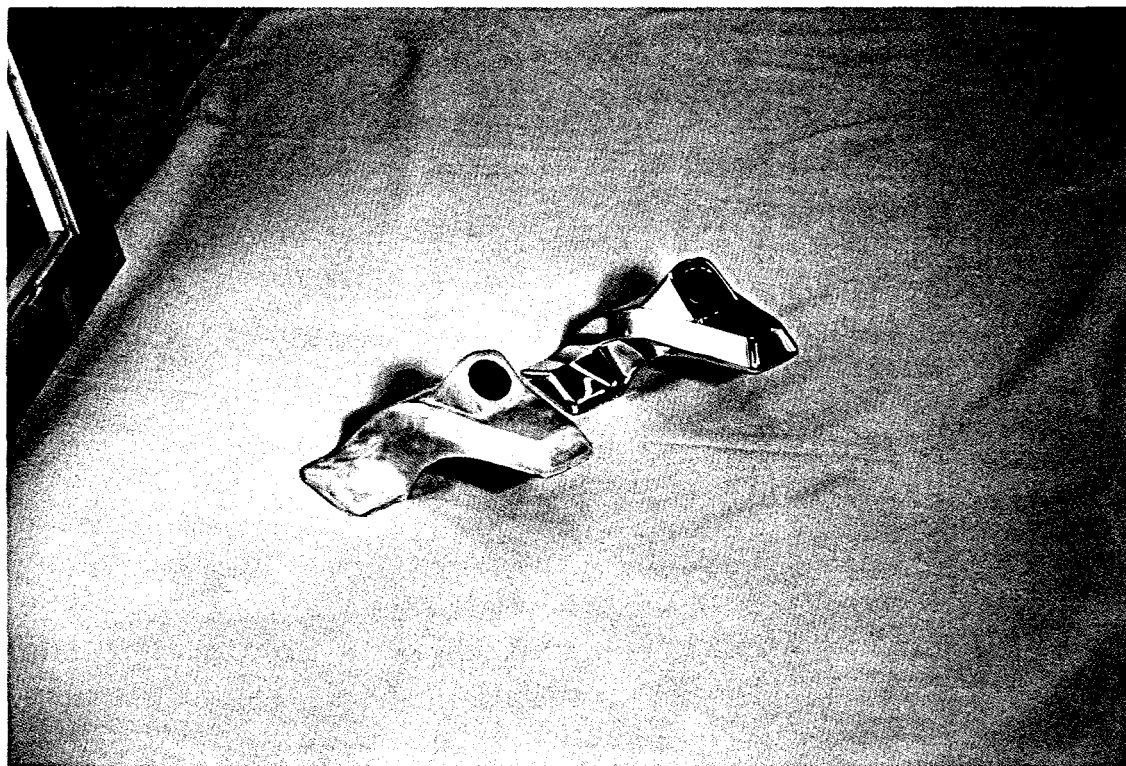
As-cast (left) and plated (right) faucet casting produced by Company A for die soldering confirmation trials.
